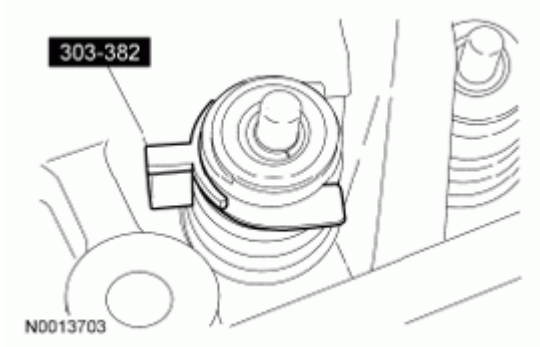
Identifying Valve Spring Compressor Spacer (303-382)
